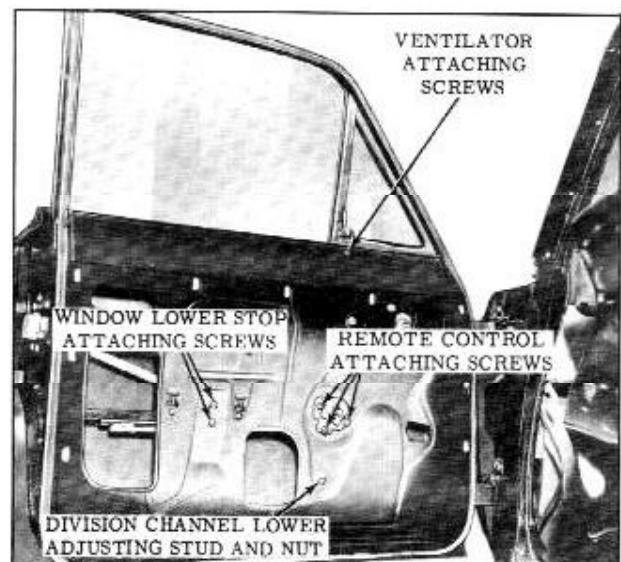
Front Door Ventilator and Remote Control Attachment
